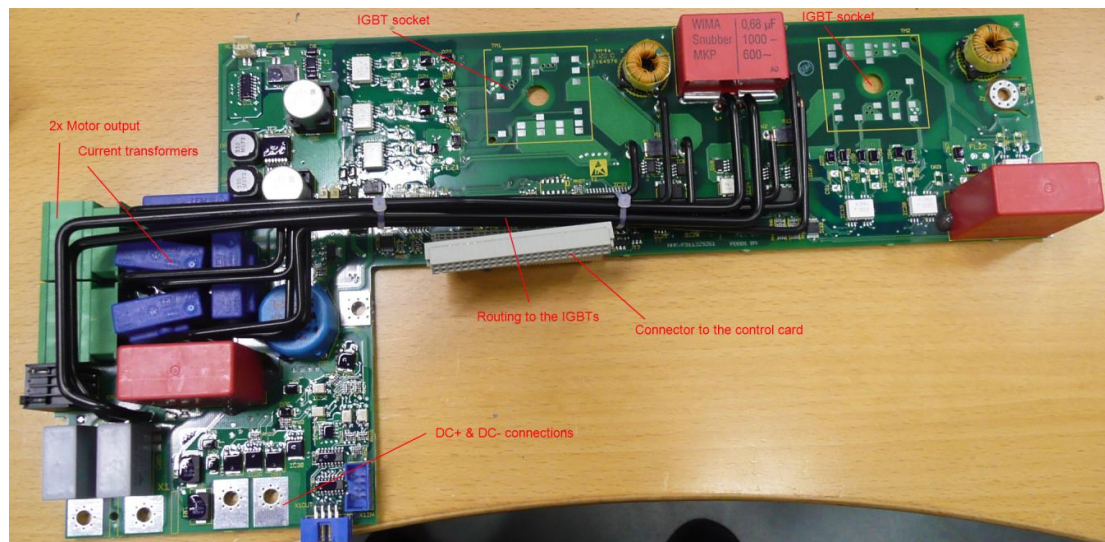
Double axis inverter power electronics PCB from Bosch Rexroth
